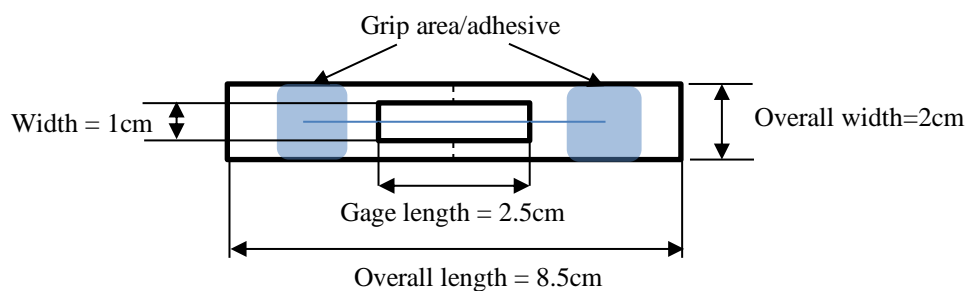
Paper card dimension to prepare specimens of single fibre tensile test
